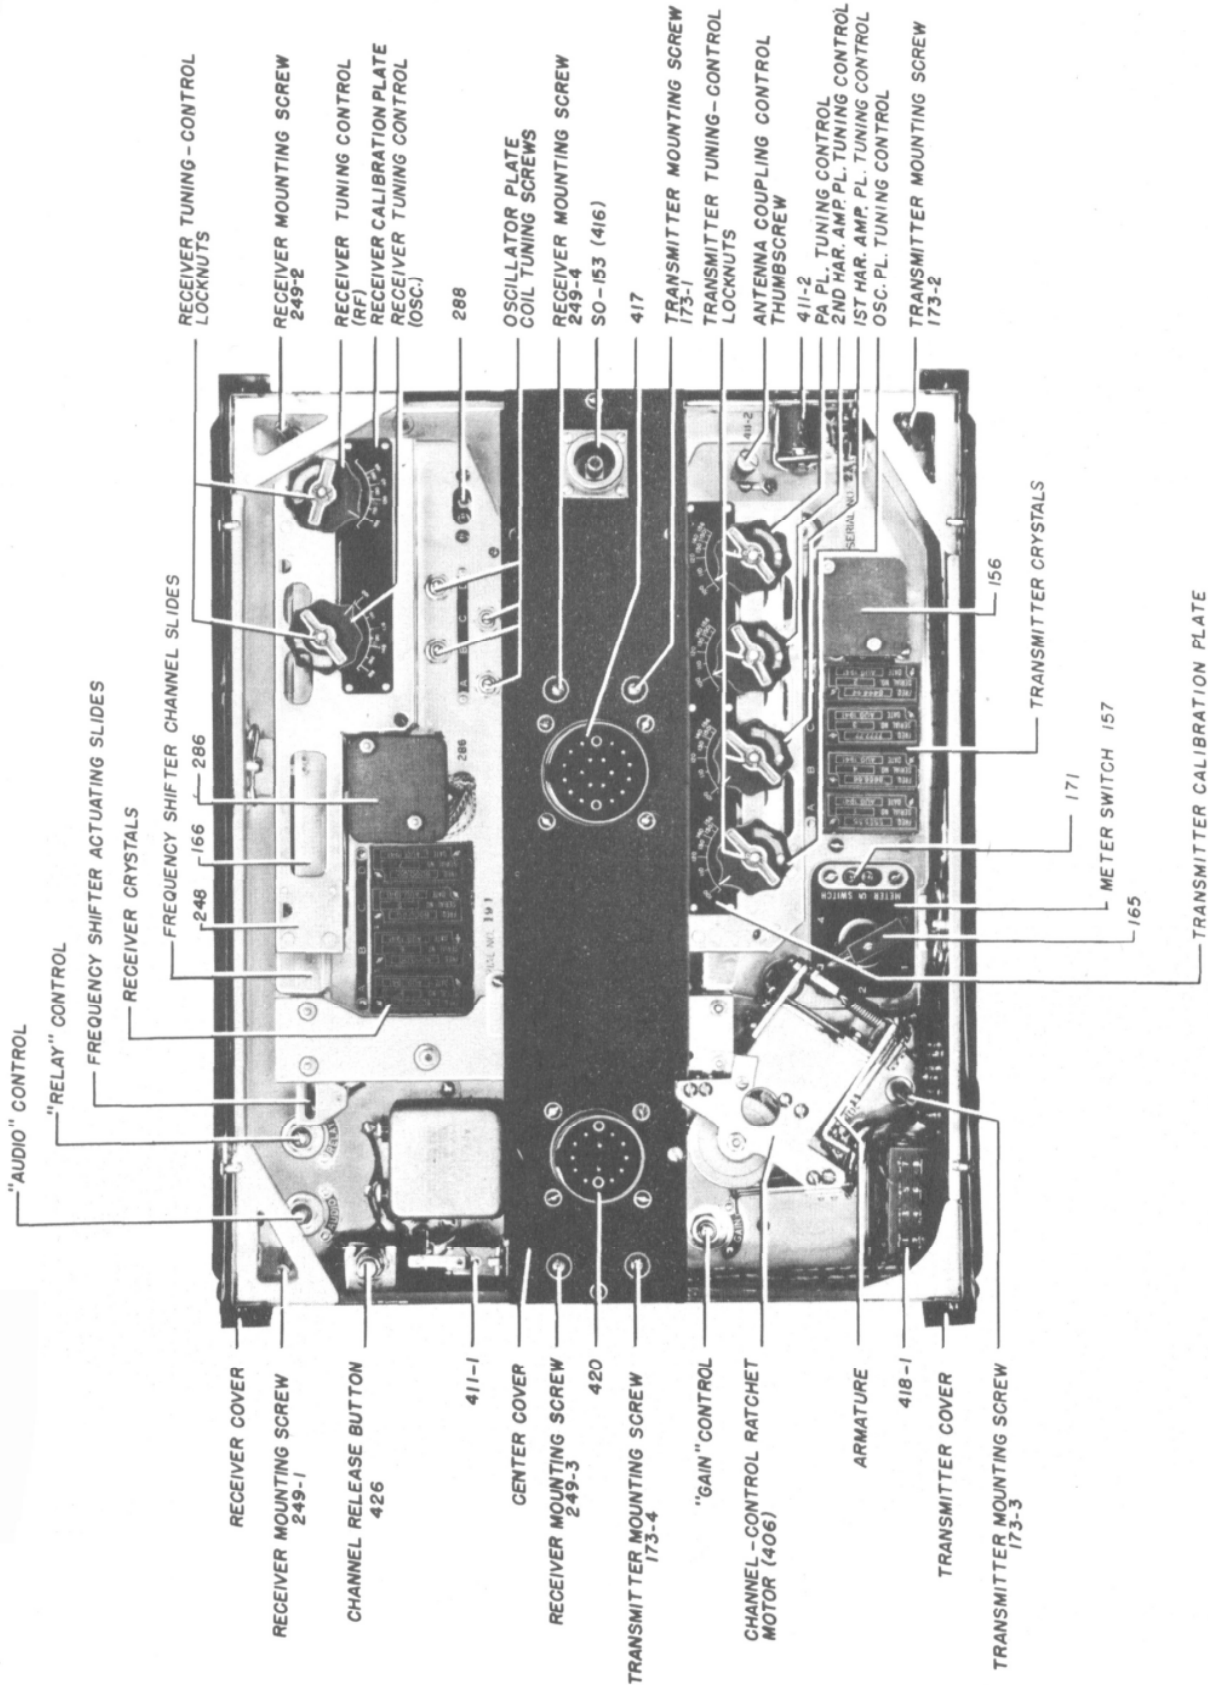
TRANSMITTER — RECEIVER ASSEMBLY, COVERS OPEN, TOP VIEW
